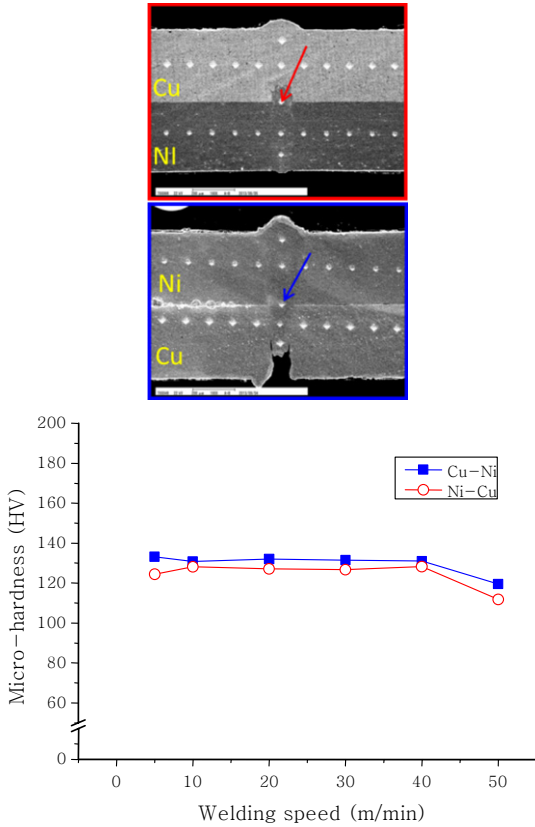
Hardness of center of Ni-Cu and Cu-Ni dissimilar welds zone by various welding speed
